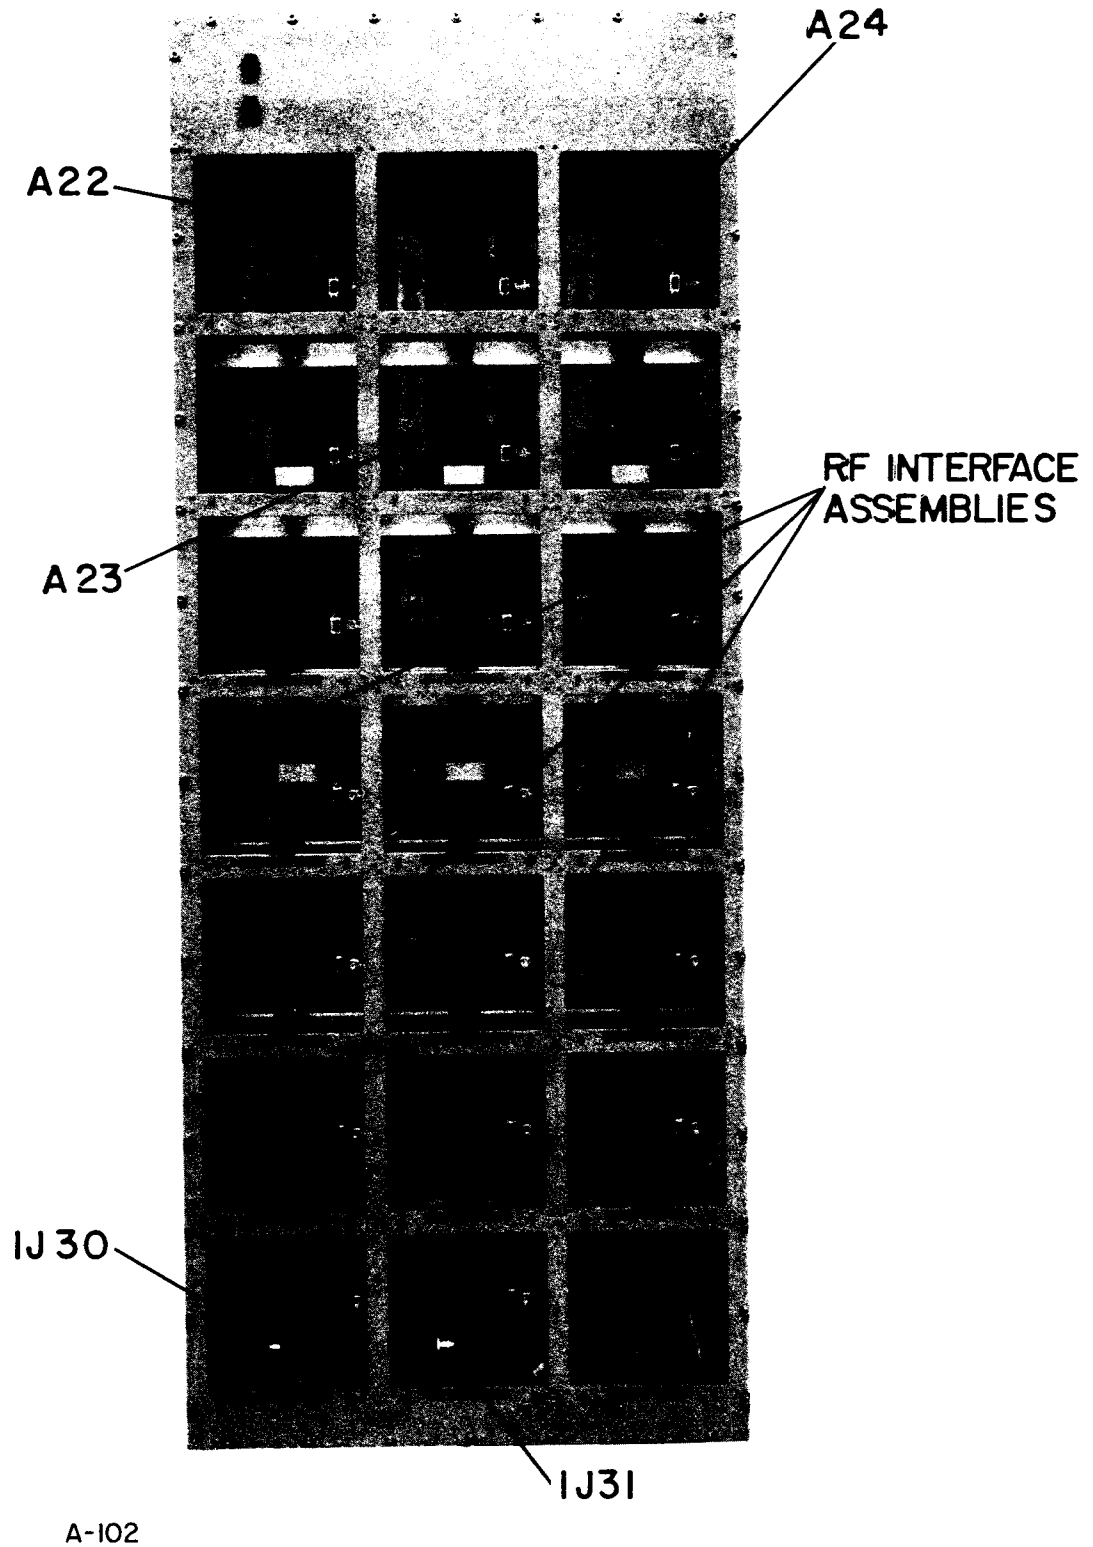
ELECTRICAL EQUIPMENT CABINET - PARTS
